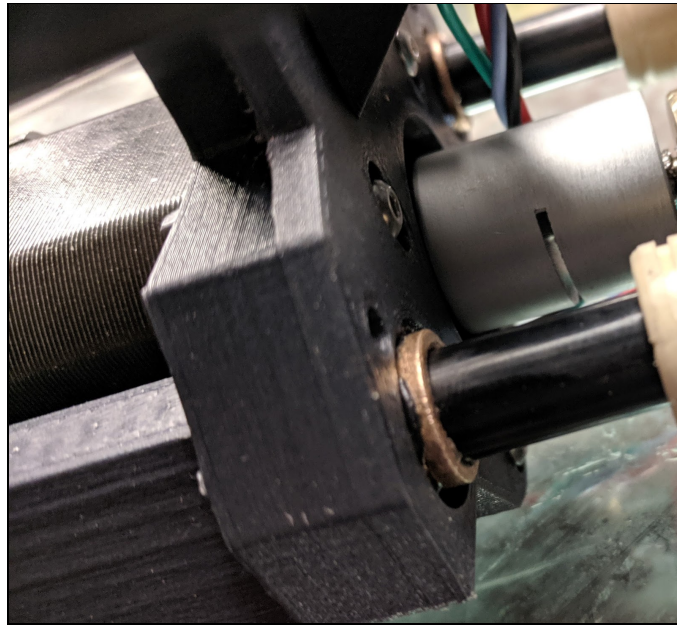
Forward end of UAV Sled installed on Linear Motion Rods, showing Stepper Motor, Rigid Coupler, and Linear Bearings
